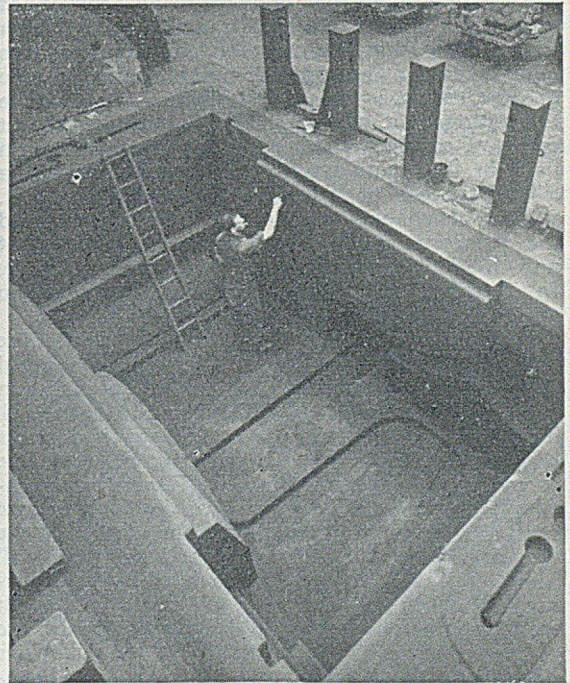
Completing a Mould for a Bottom-half Exhaust Casting for 60,000 kw. Turbine at Fraser & Chalmers Engineering Works.
